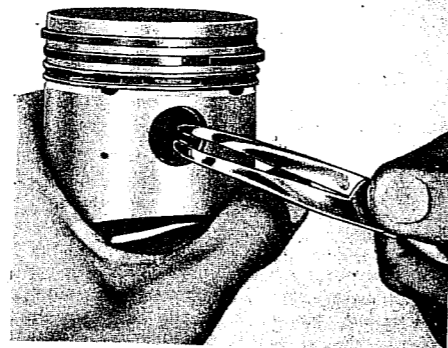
Removing the piston pin circlips using circlip pliers.
